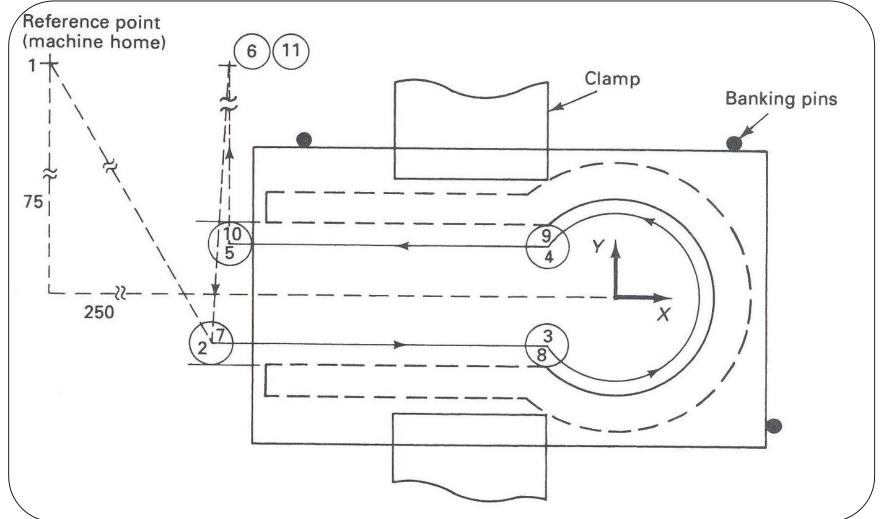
(a):Cutter path for milling the inside of the part the part of Fig. 6
